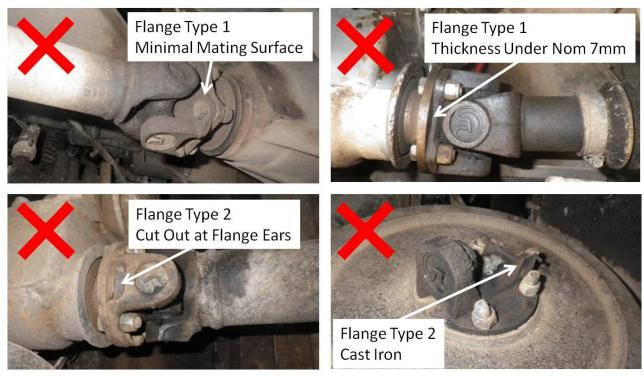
Incorrect Flanges Fitted (for flange identification details, refer to Figures 4, 5 and 6)
